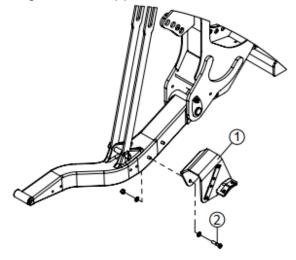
Lift Arm Assembly Install Key 1 – Lift Arm Assembly Key 2 - Hardware
